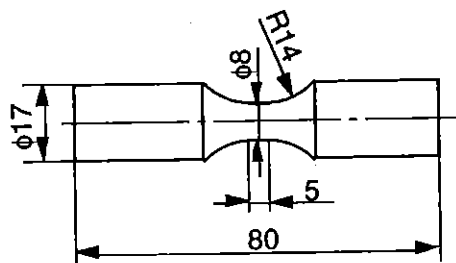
Shape and dimensions of test specimens. All dimensions are in mm.
